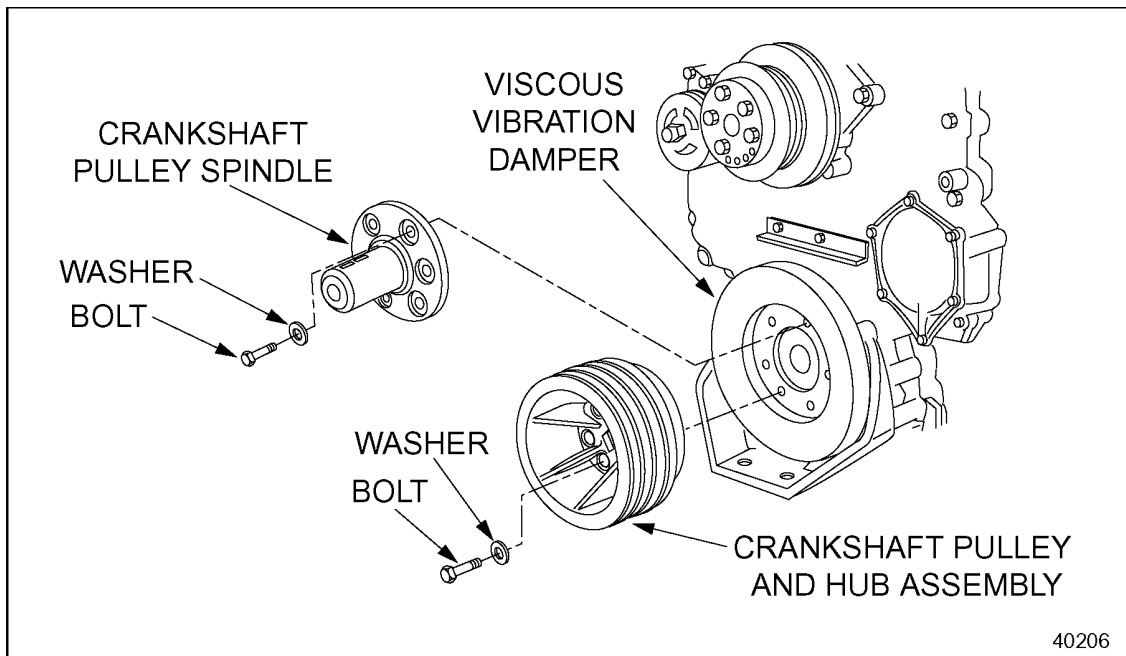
Viscous Vibration Damper Mounting with Crankshaft Pulley or Crankshaft Pulley and Hub Assembly with Spindle
